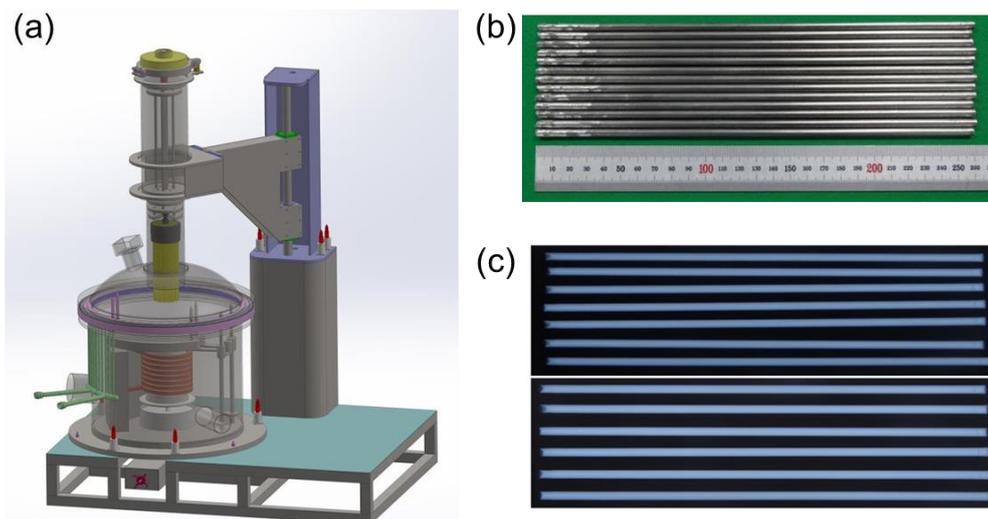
(a) Schematics of injection casting furnace, (b) U-10wt.%Zr fuel slugs fabricated by the injection casting and (c) γ ray radiographs for the fabricated fuel slug.
